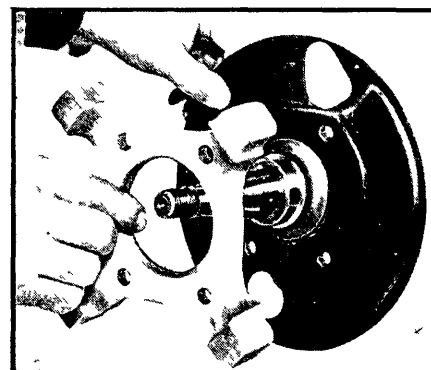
Removing spider and dust shield. Chrysler front disc brake
